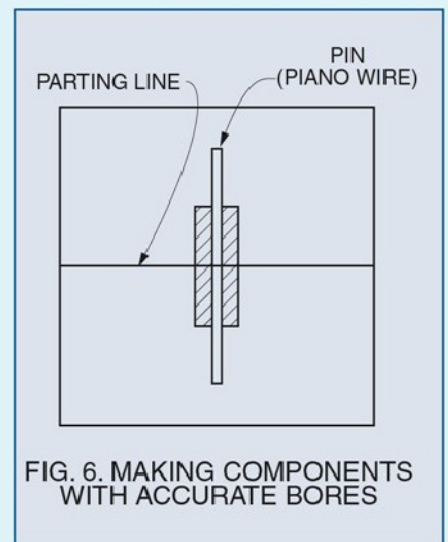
MAKING COMPONENTS WITH ACCURATE BORES
